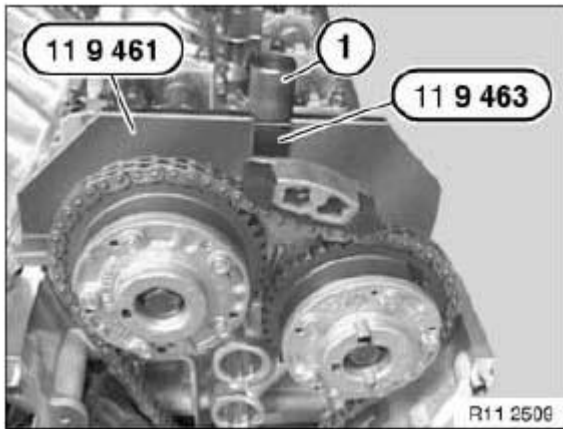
Identifying Special Tool (11 9 461) And (11 9 463)
